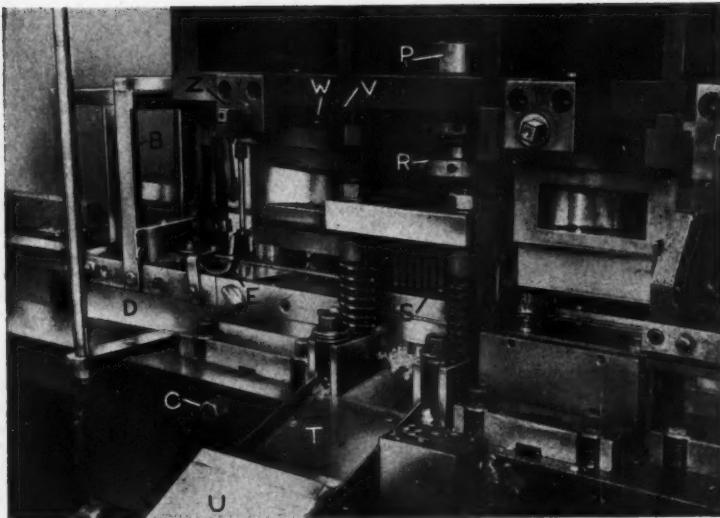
Close-up view of the multi-stage press tool, showing the units for the stamping, piercing, and first-forming stages. The piercing tool is mounted in a separate die-set, since it has a shorter stroke than the other units
